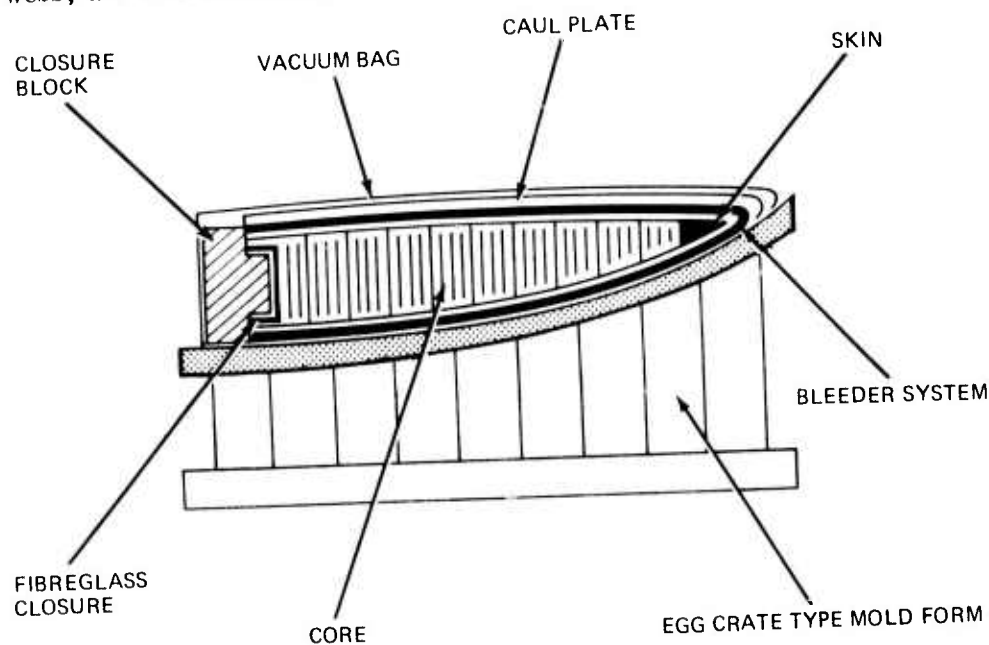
Layup and Tooling for Cocuring a Trailing Edge Assembly
